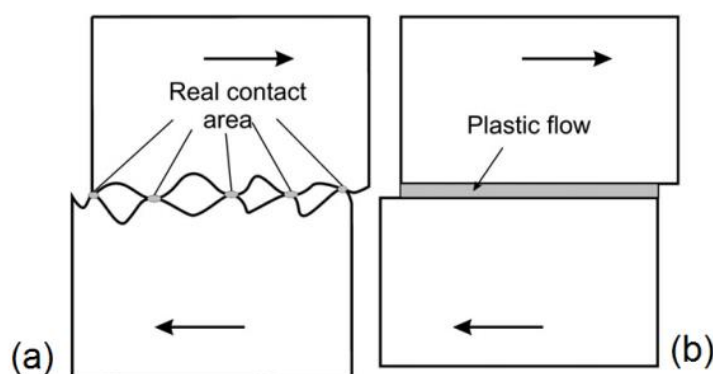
Illustration of interfacial conditions during friction welding
